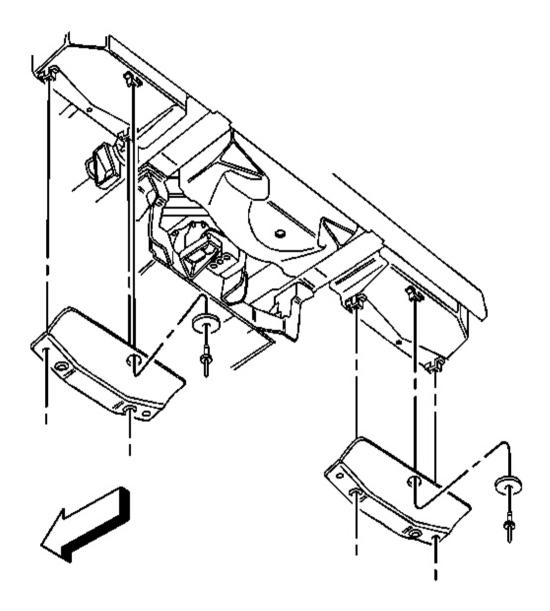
Left/Right Heat Shield Washers & Shield Courtesy of GENERAL MOTORS CORP.
